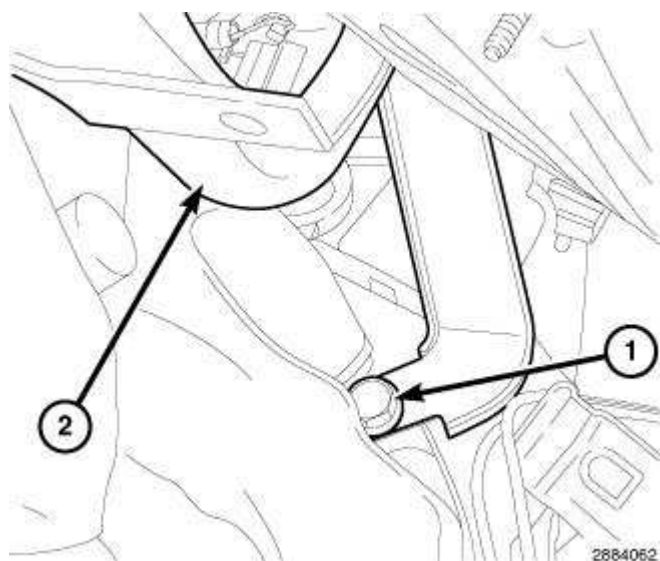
Upper Transmission-To-Engine Bolt & Transmission Oil Level Indicator Tube
